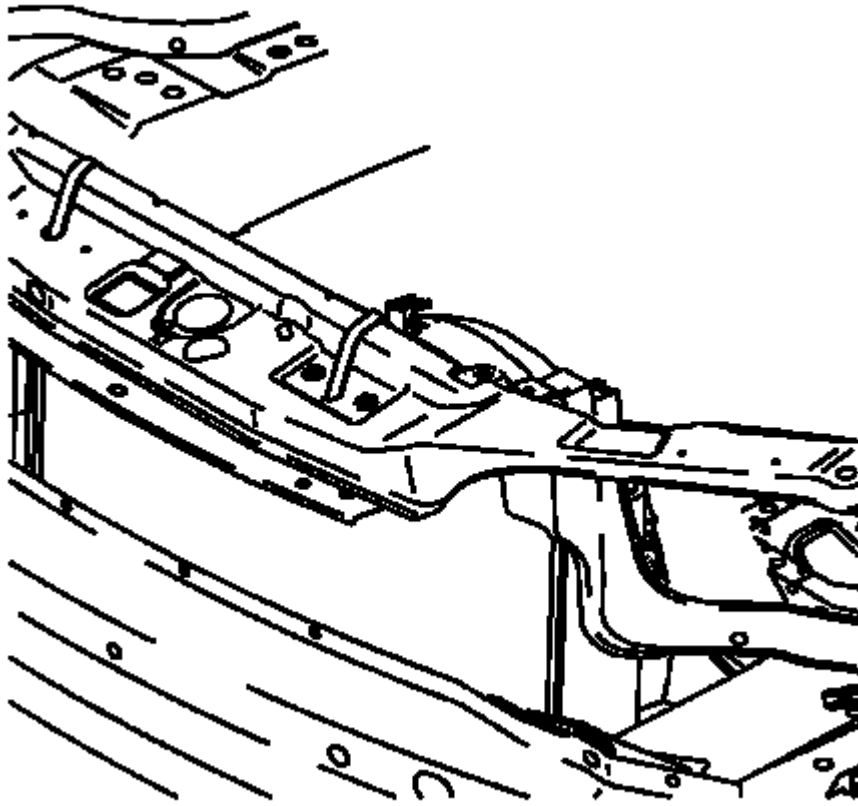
View Of Cooling Module Secured To Upper Body Structure
